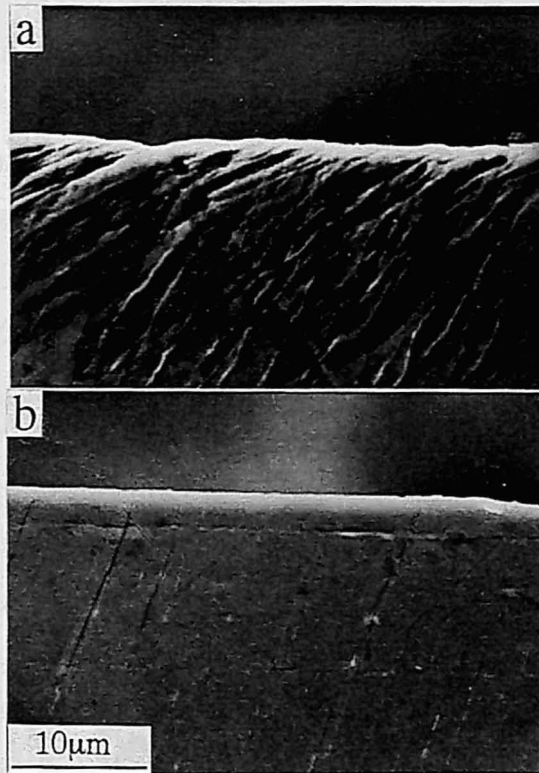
SEM photographs showing the specimen surface in the vicinity of the fracture surface in (a) Type A and (b) Type B crackings.
